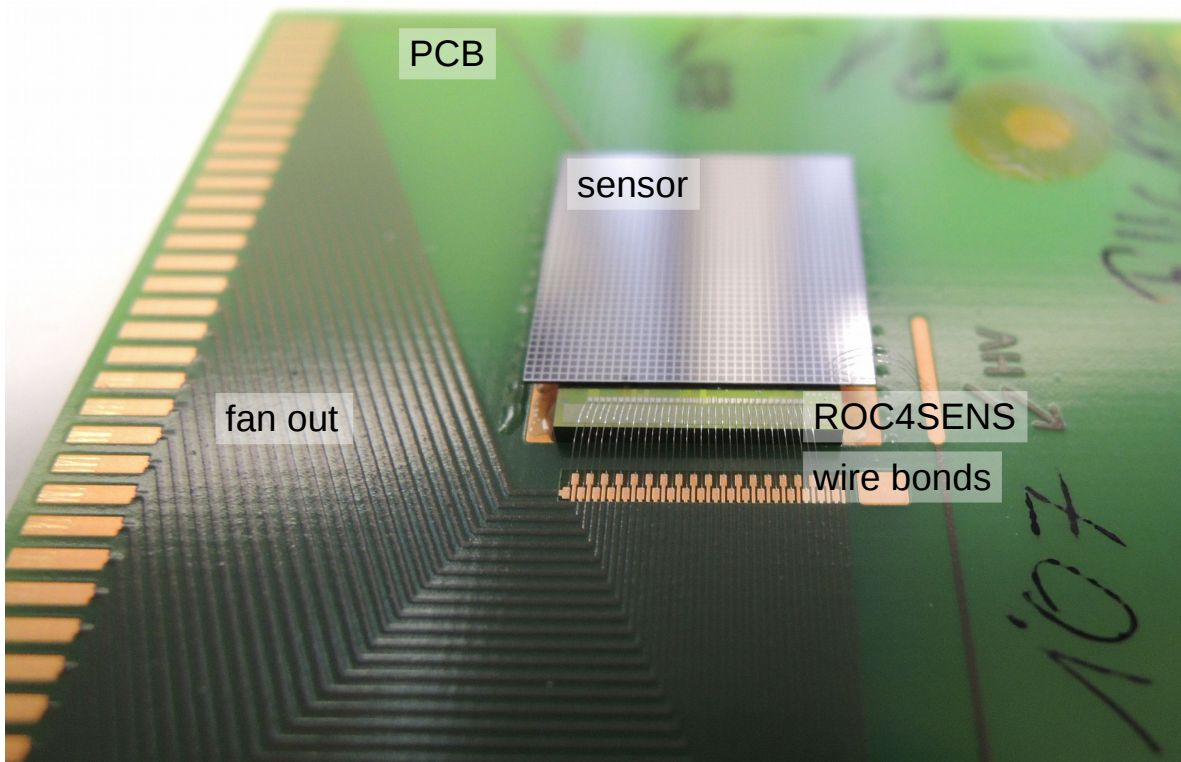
ROC4SENS readout chip with a bump bonded pixel sensor on top. The ROC4SENS is glued and wire bonded to a custom PCB with fan out.
